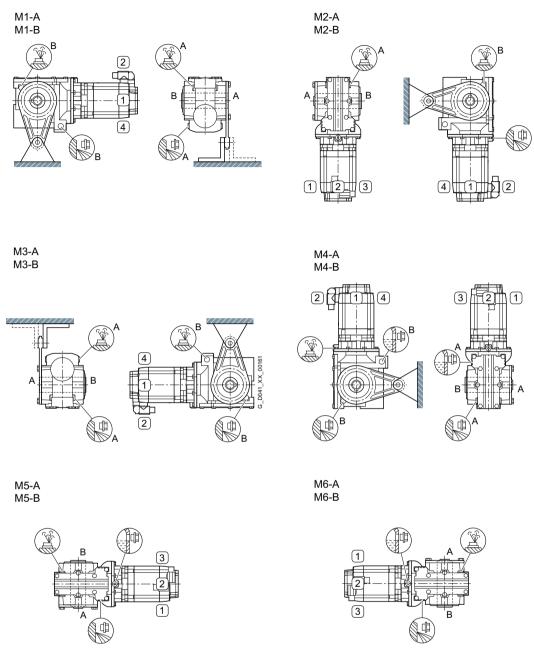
Mounting positions for servo helical worm geared motor CAD, shaft-mounted design, frame size 29, 2 stage
